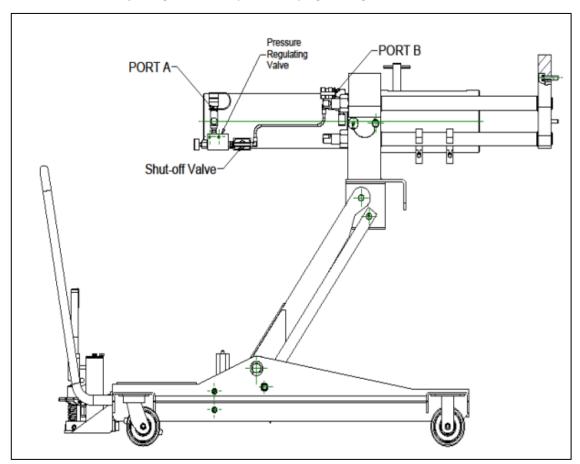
Hose Connection & Adjusting the Pressure Regulator Valve
